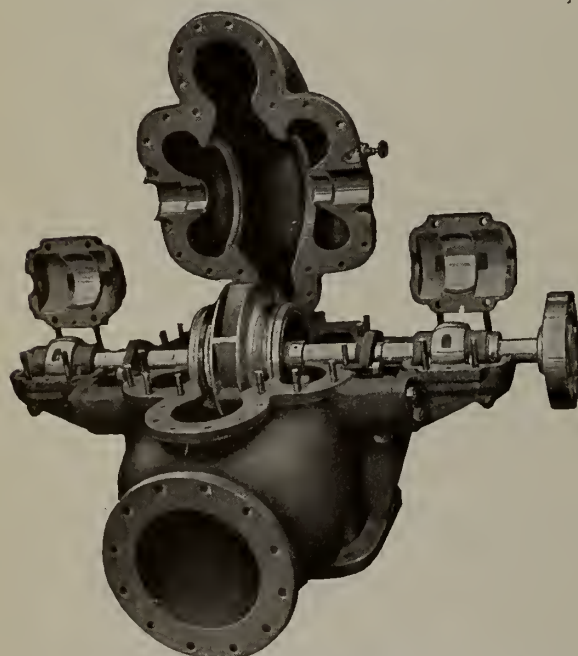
Double-Suction Volute Pump, with Casing Open Ready for Inspection
